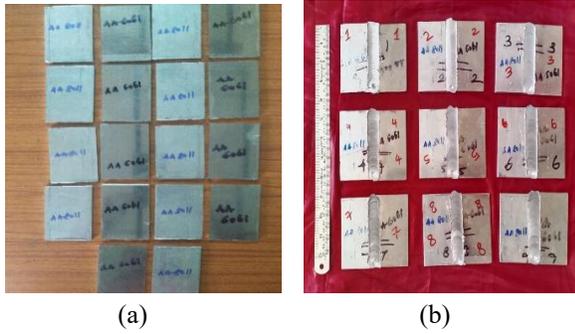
Weld plates Before and after image 100\*100\*4mm
